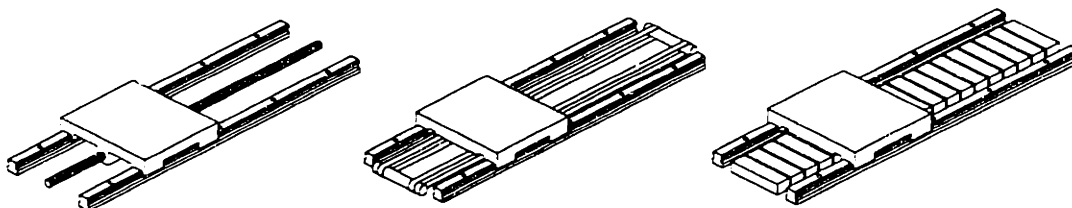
Horizontal linear drive concepts - ballscrew, belt drive, and linear motor.
